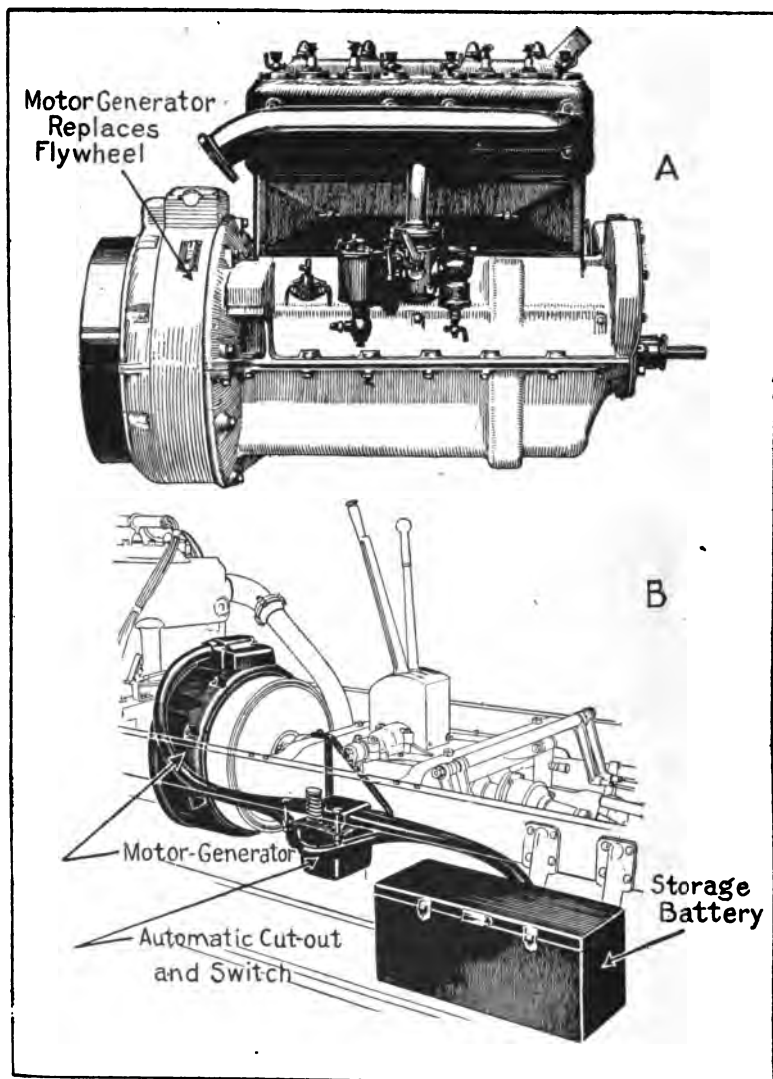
U. S. L. One Unit Starting System in Which Combination Motor-Generator Replaces the Engine Flywheel.
